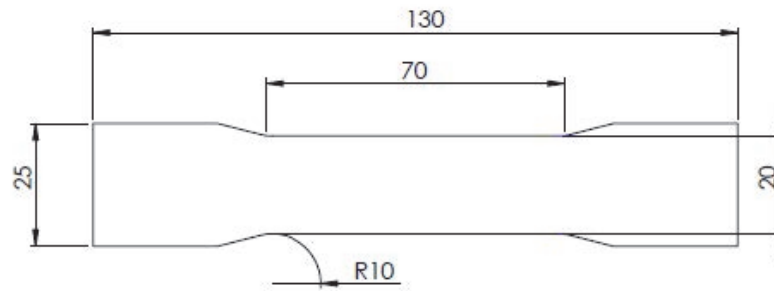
Geometry and dimensions (mm) of fatigue specimens.
